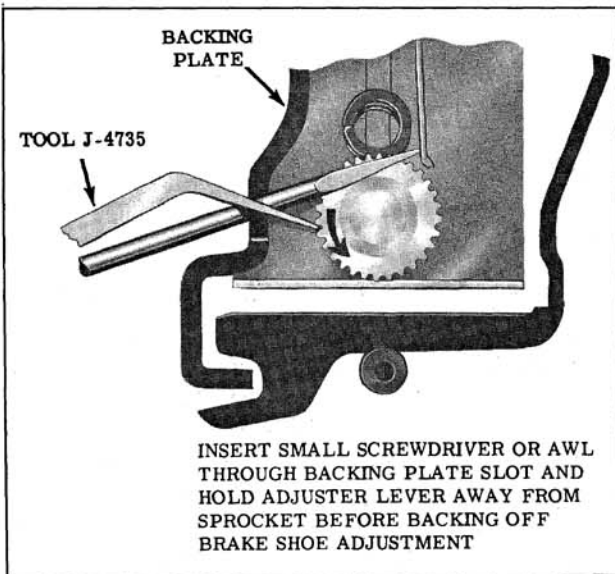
Backing Off Brake Shoe Adjustment (33 through 38 Series)
